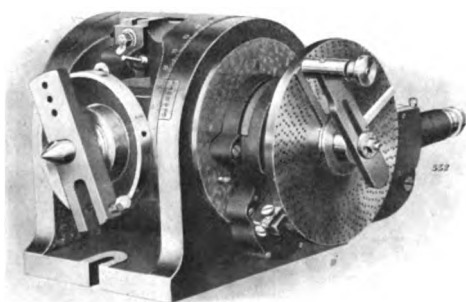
Universal Dividing Head Used on All Cincinnati Universal Millers
